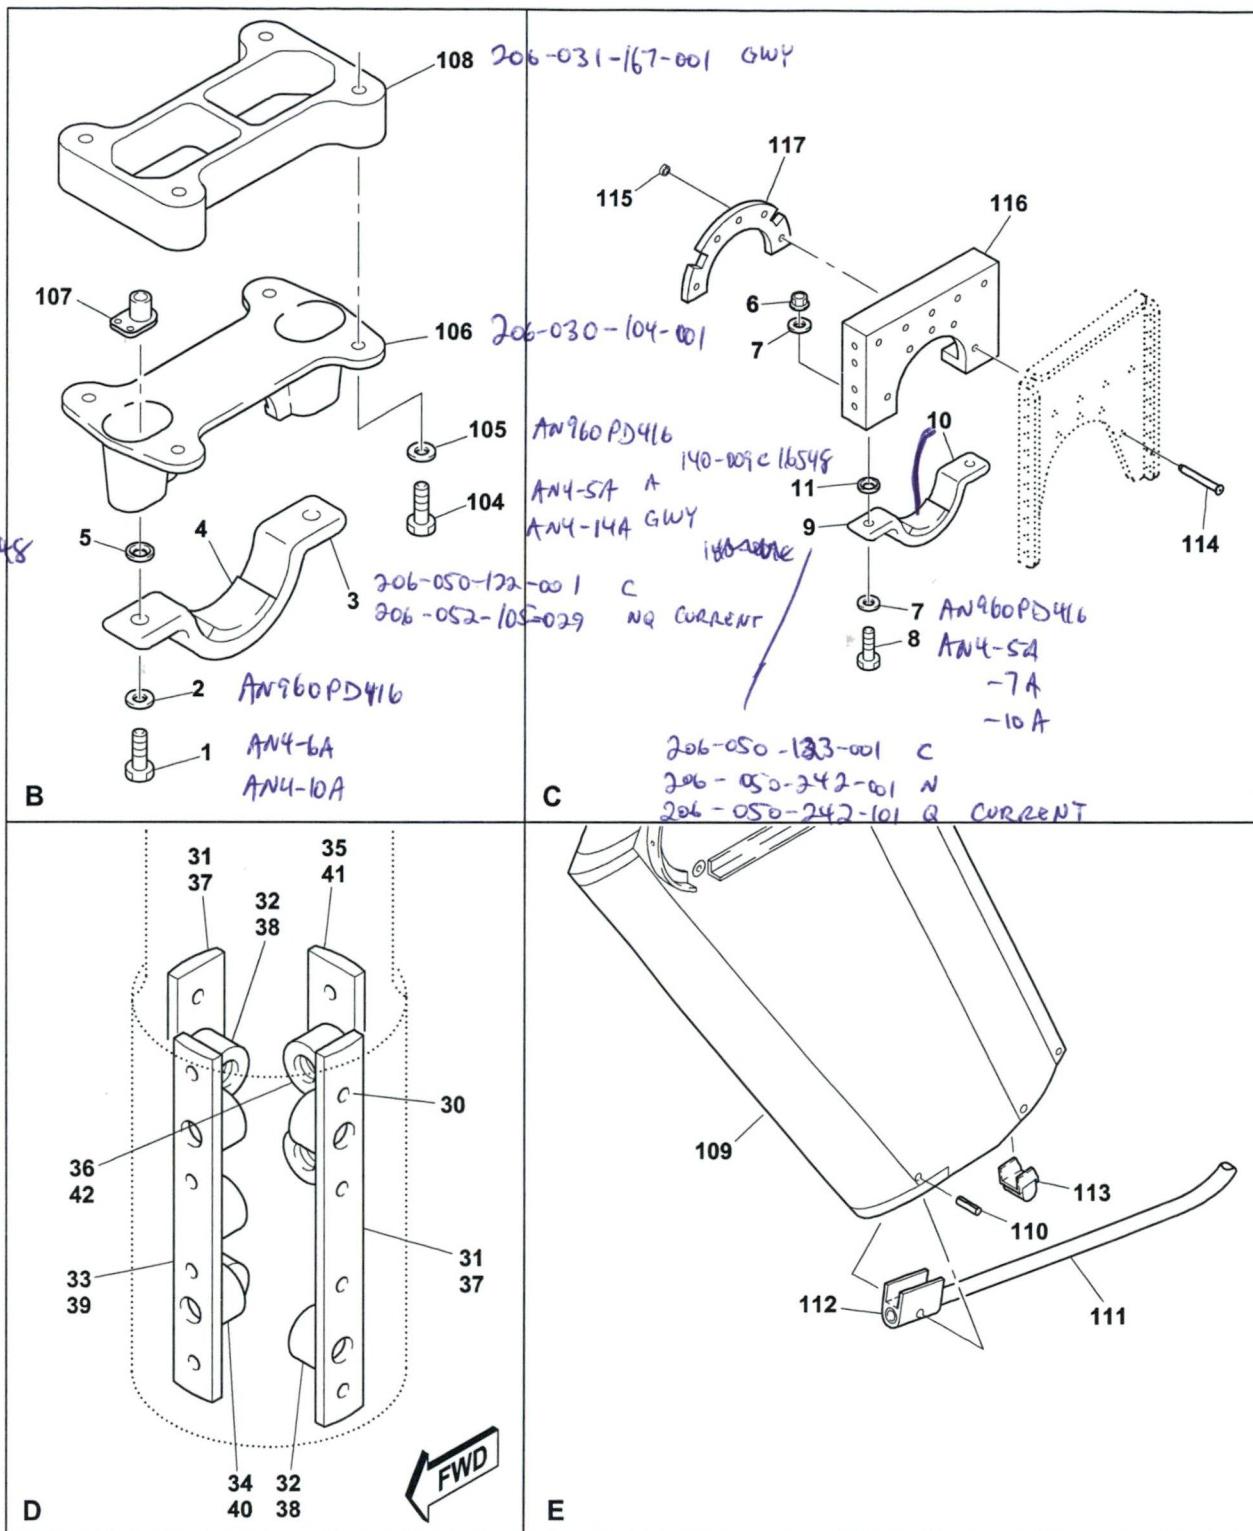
Kit, High Skid Gear and Support Installation (Sheet 2 of 4)
